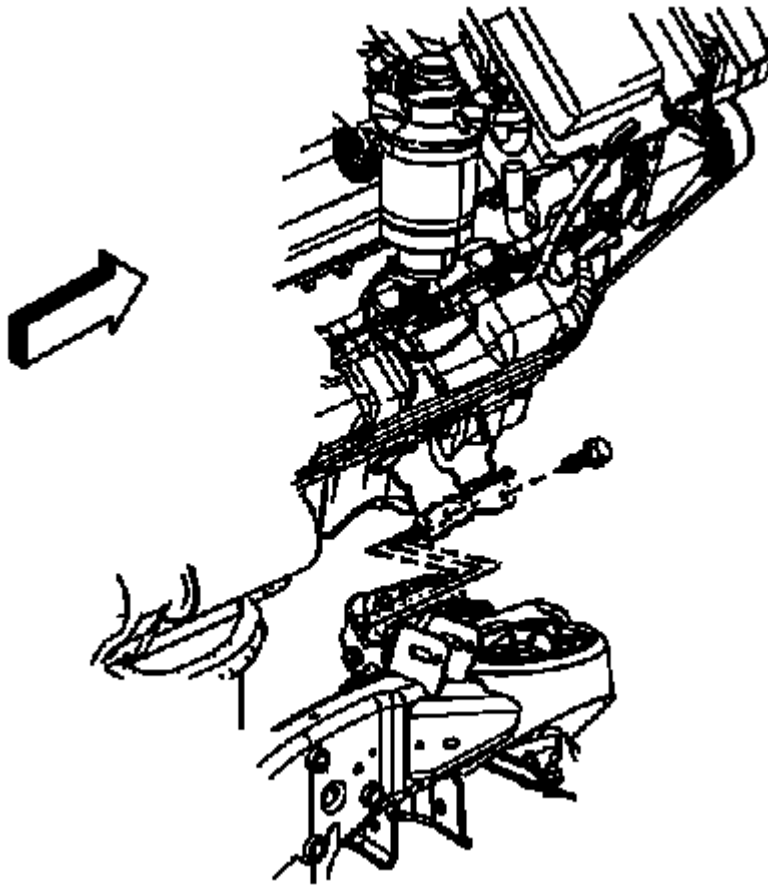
View Of Engine Mount To Engine Mount Frame Bracket Bolt (Right)
